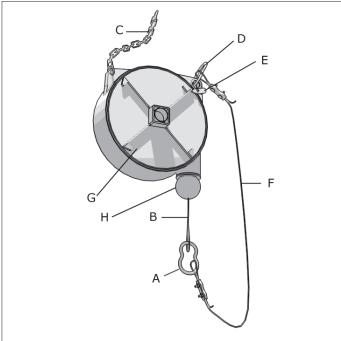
Main components and elements. Showing Balancer-300 with optional balancer locking cable
